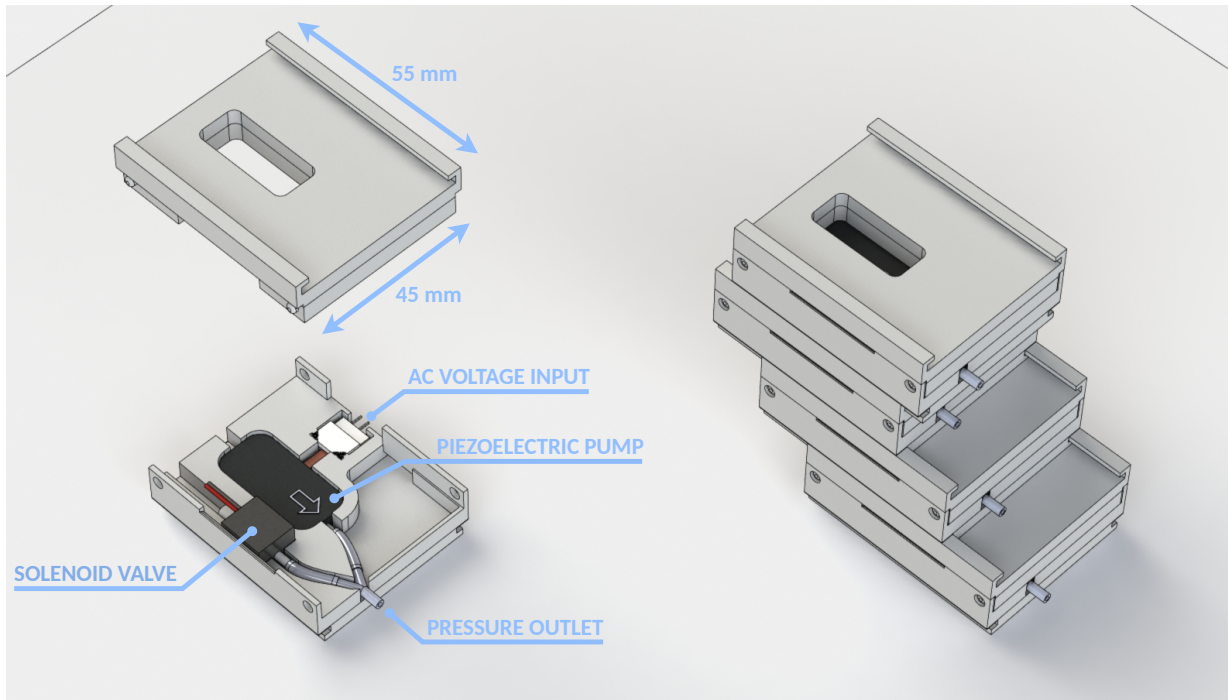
Proposed pump design exploded CAD assembly and 4-pump stack
